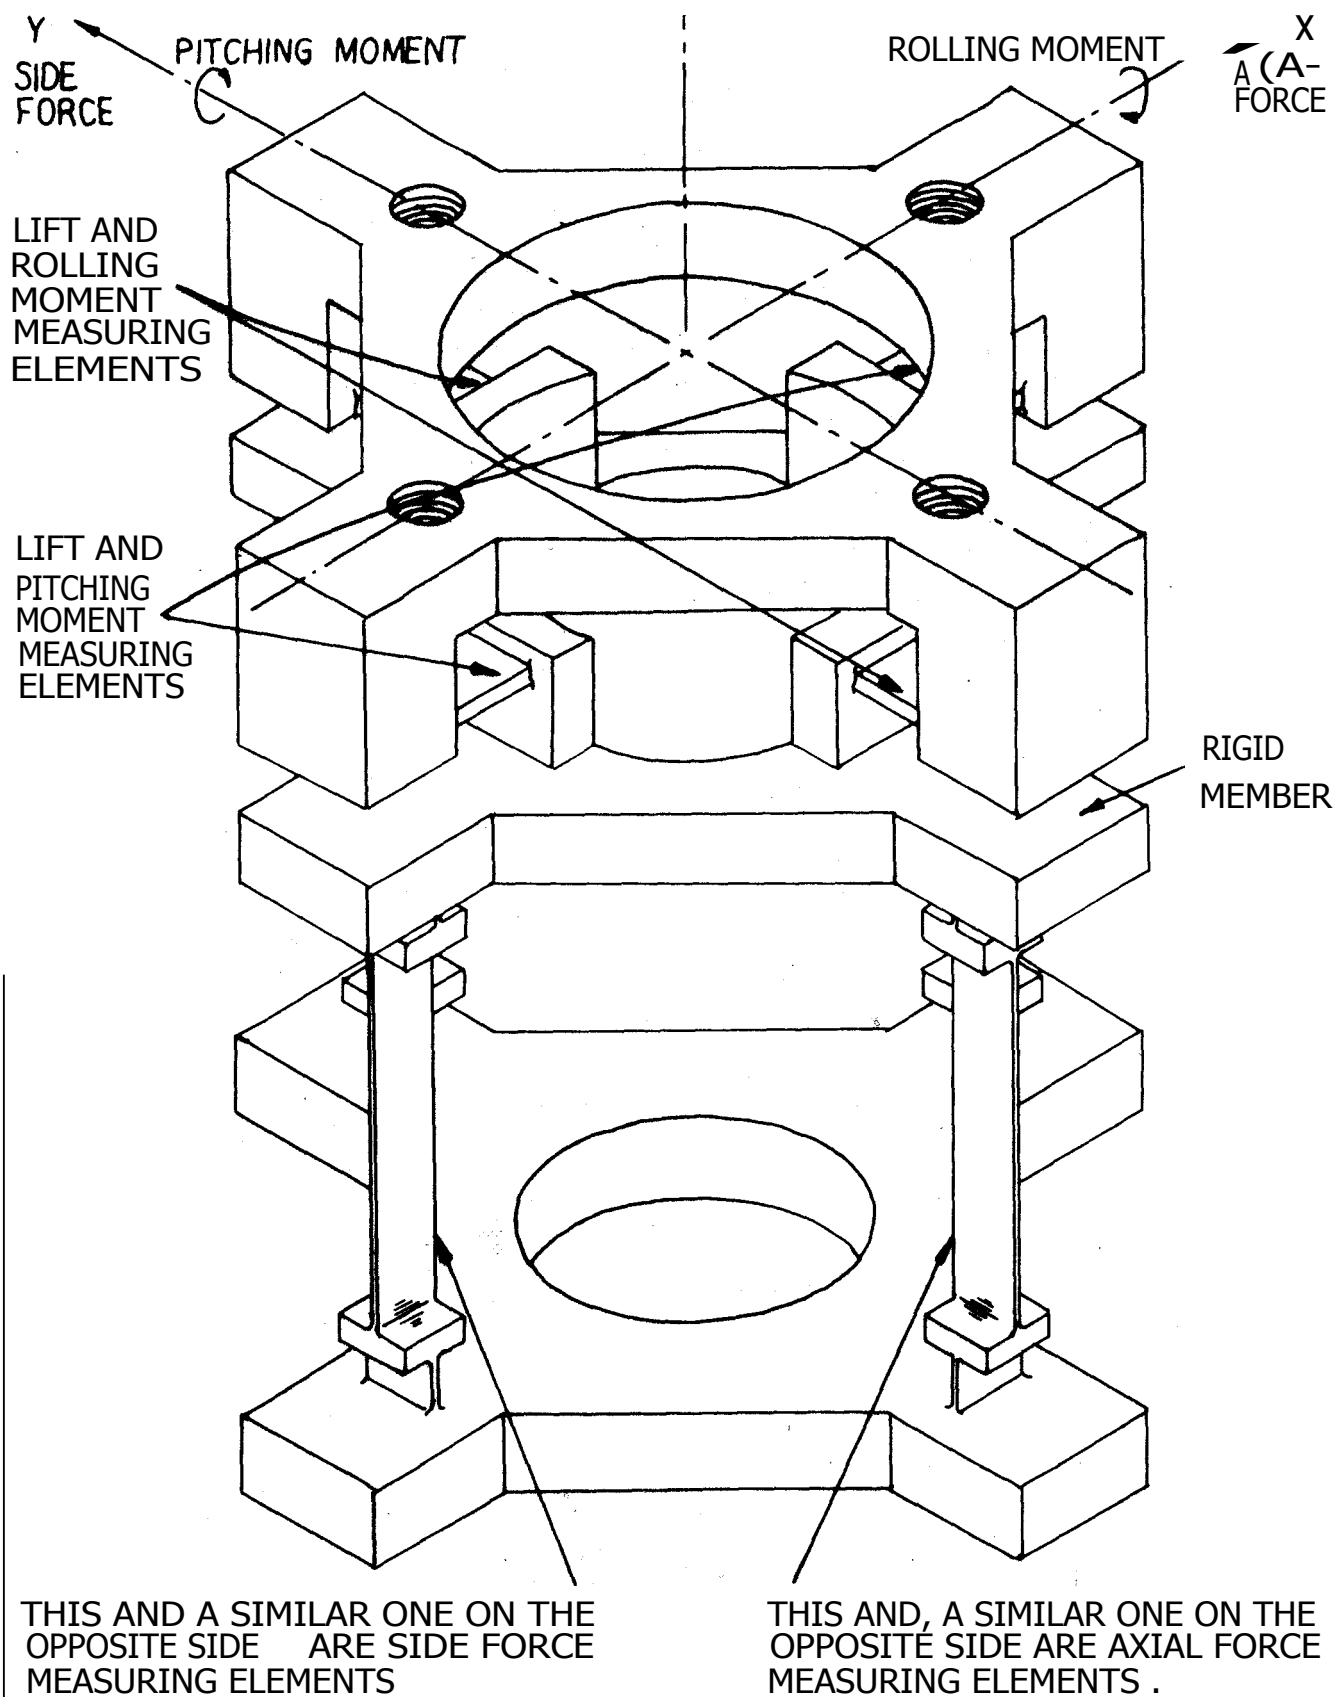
ISOMETRIC VIEW OF THE ROTOR BALANCE
